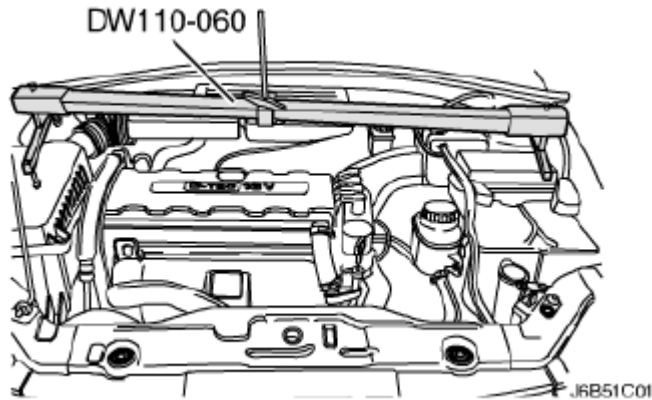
Identifying Engine Assembly Support Fixture (Dw110-060)
